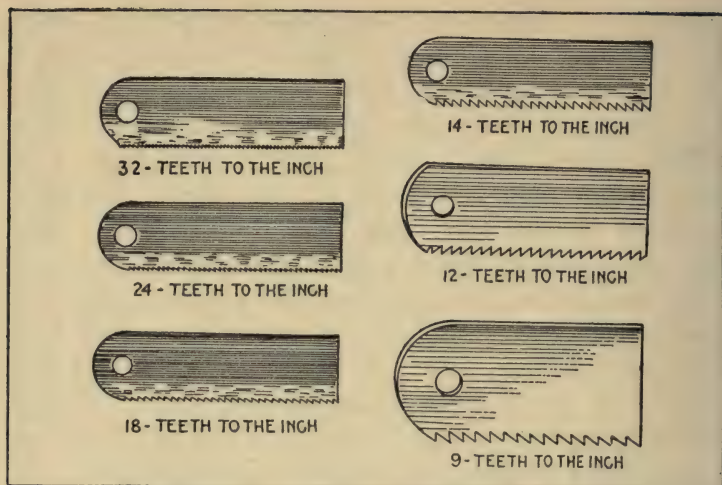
TOOTH SPACING IN HACK-SAW BLADES
